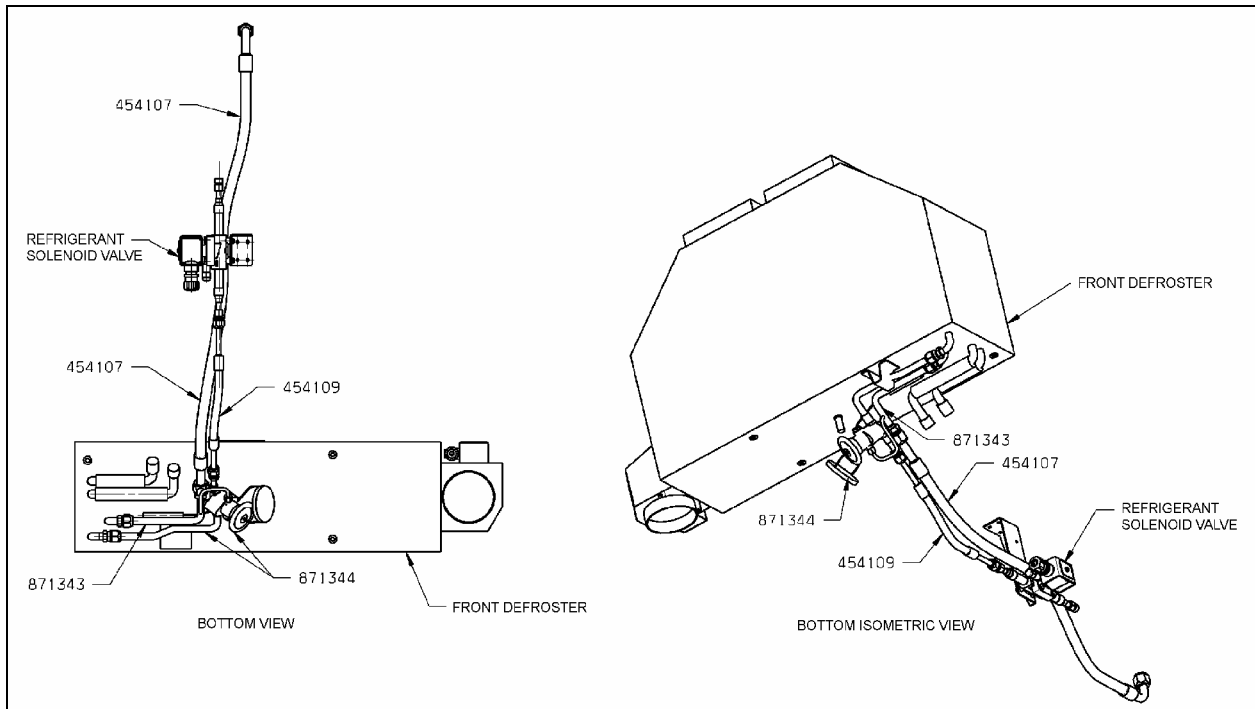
VIEW OF INSTALLATION – FRONT SECTION
